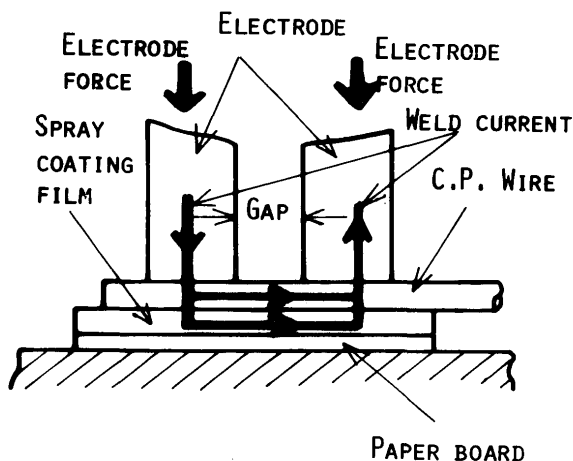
Schematic illustration of parallel gap resistance welding
